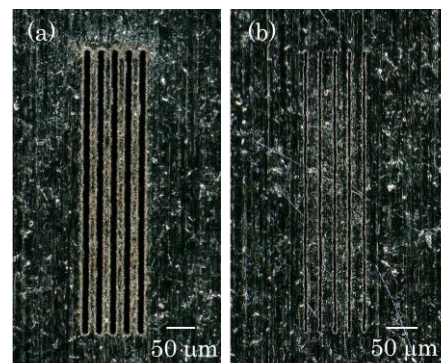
Optical images of stainless sheet after laser processing (a) surface and (b) rear sides.
